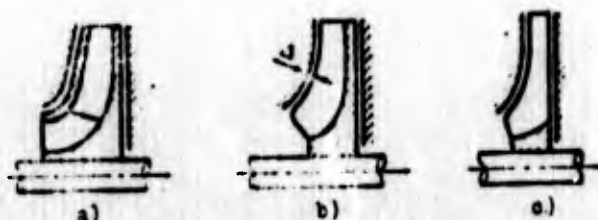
Types of centrifugal wheels: a) double shrouded; b) single shrouded; c) unshrouded.
